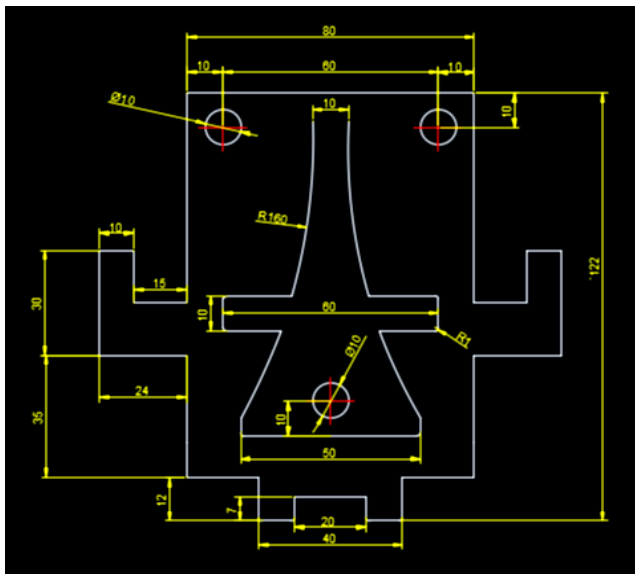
Drafting of component unfolded view. All dimension are in mm.
